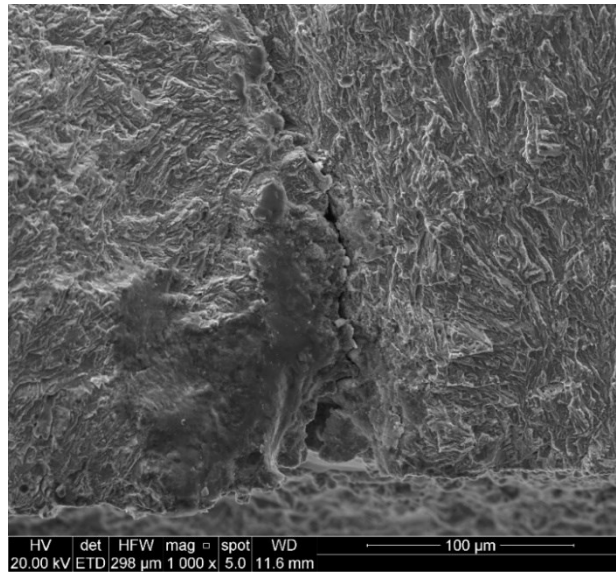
Detail of L3AB-2 fracture surface in the crack initiation zone.
